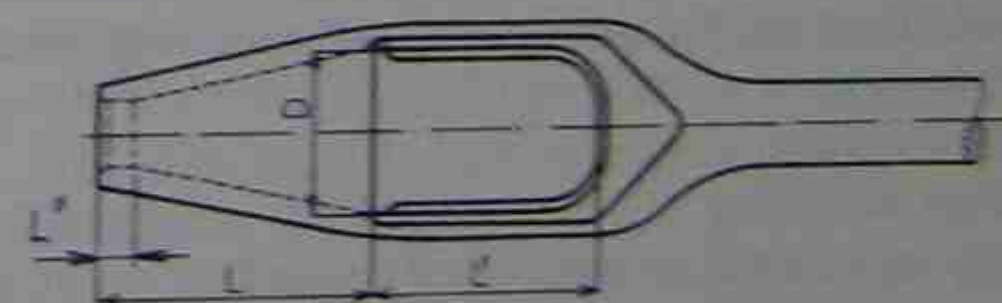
Tapered babbitted rope socket and shackle rod in one piece.
